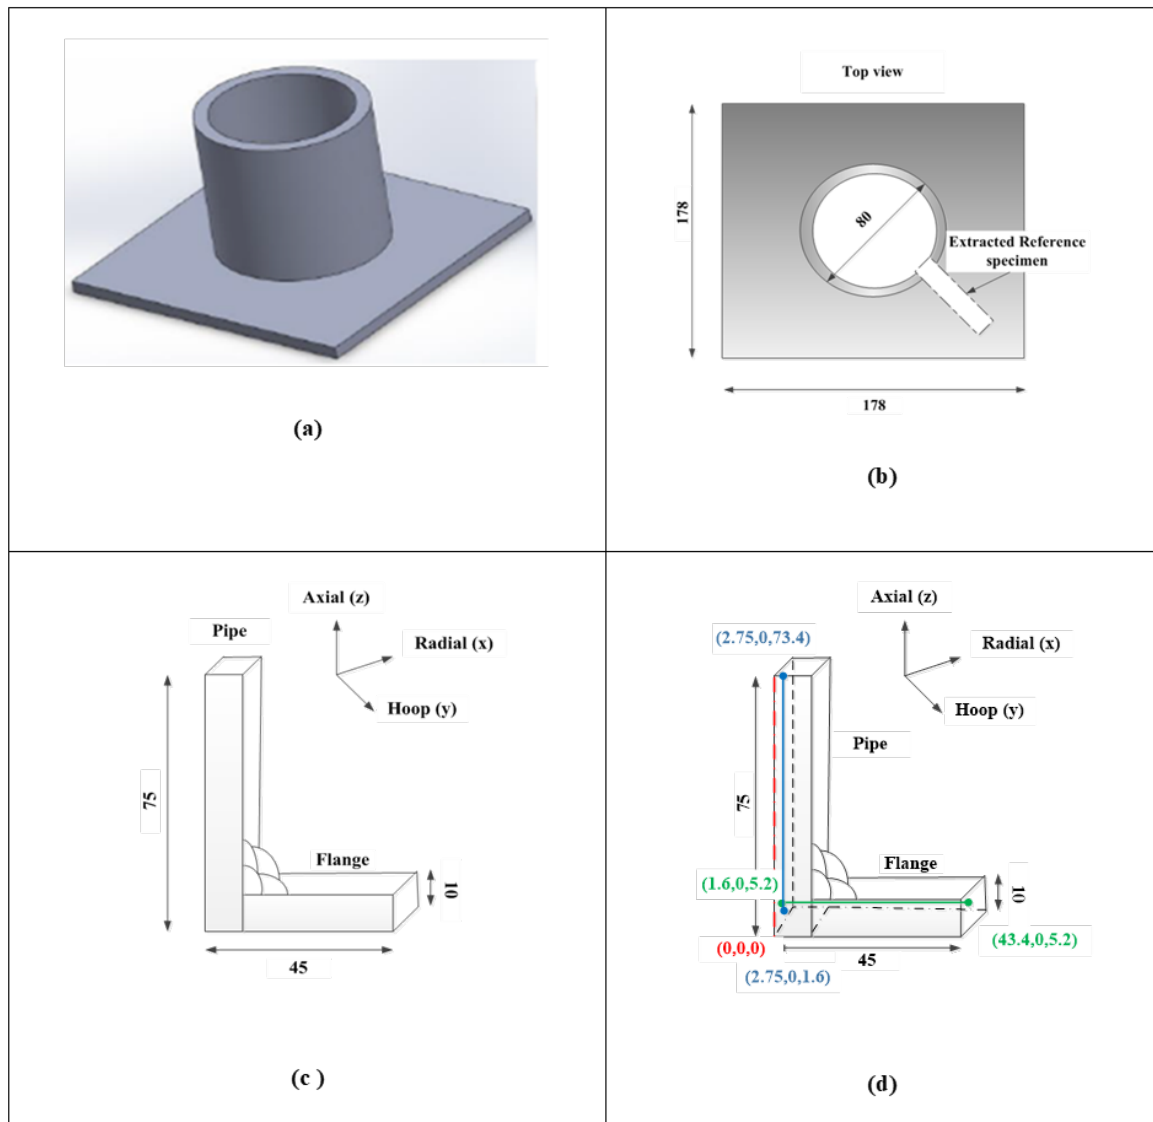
a) Schematic illustration of a top view of the welded component and the area where the L-shaped reference specimen was sectioned. (b), (c) Below the top view is a 3D CAD image of the welded component (d) Post-weld heat treatment was performed on six L-shaped specimens from each welded component at 950 and 1050 °C, followed by air cooling, furnace cooling, or water quenching.
